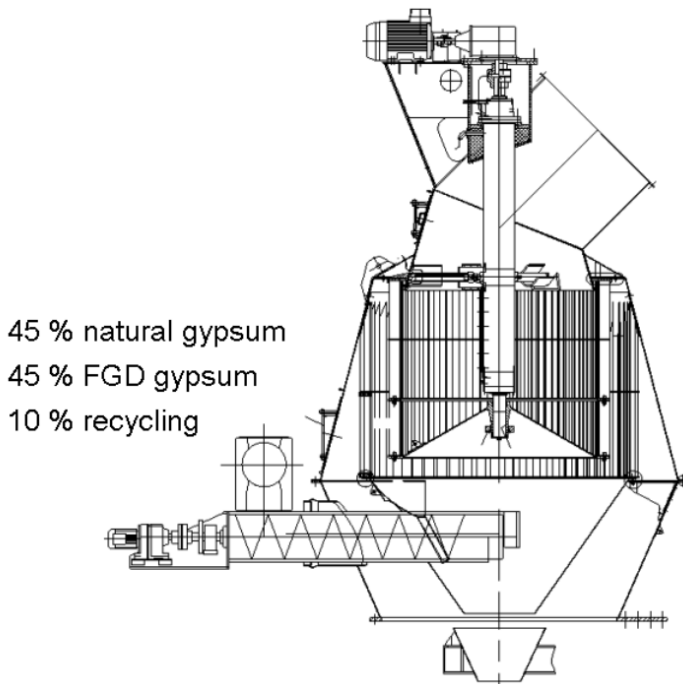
The 60t/h MPS 2500 GC grinding-calcining mill, designed for up to 45% FGD gypsum, includes a special rotary feeder and double-shaft screw conveyor.
